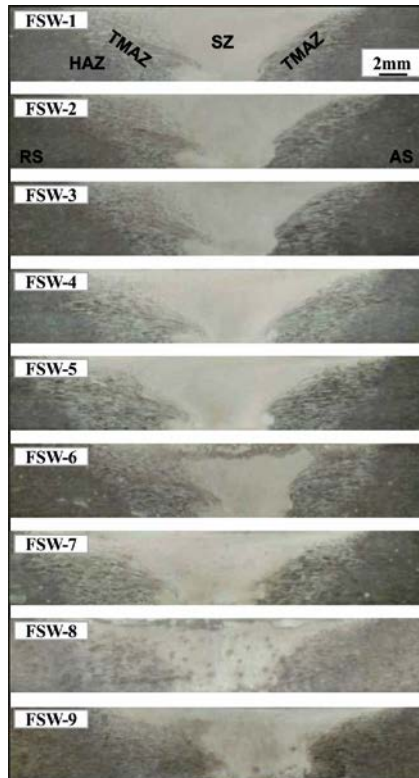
Macrostructure of the friction stir welded joints.
